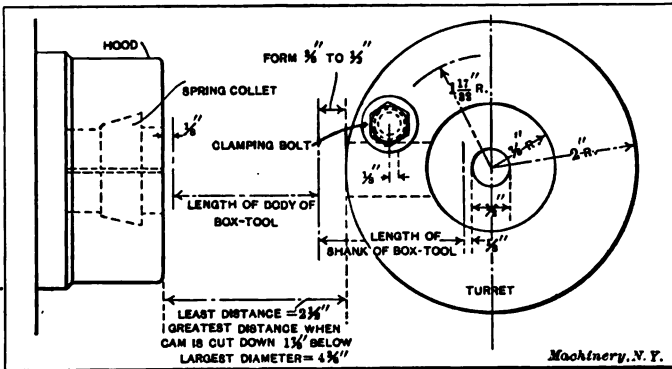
Method of Determining Length of Body and Shank of Box-tool
